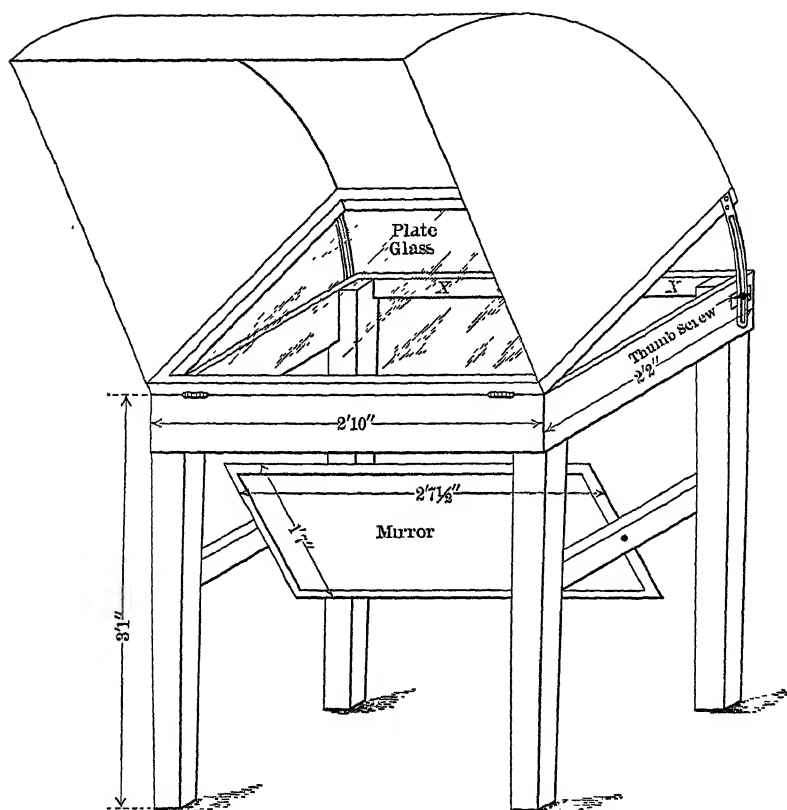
ELEVATION OF GLASS-TOP DRAFTING-TABLE, WITH HOOD.
